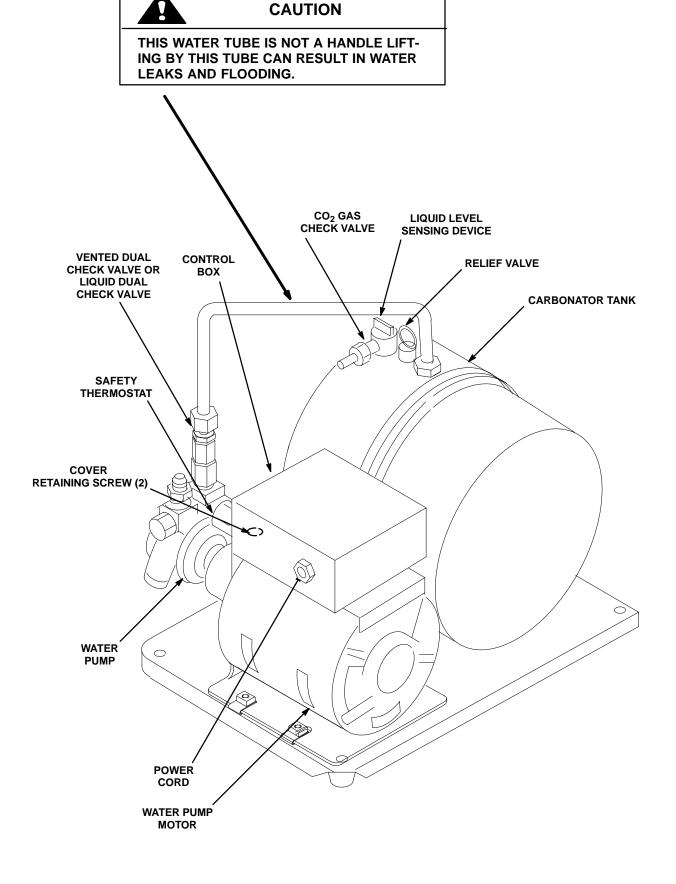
CARBONATOR ASSEMBLY COMPONENTS
